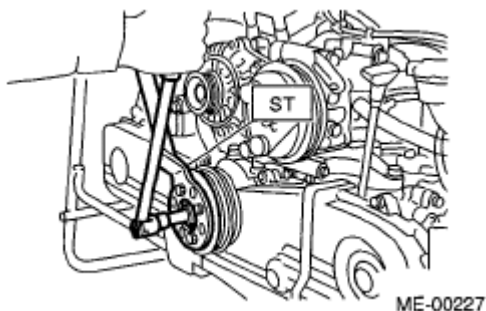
Tightening Crank Pulley Bolt Using Crank Pulley Wrench ST499977100
